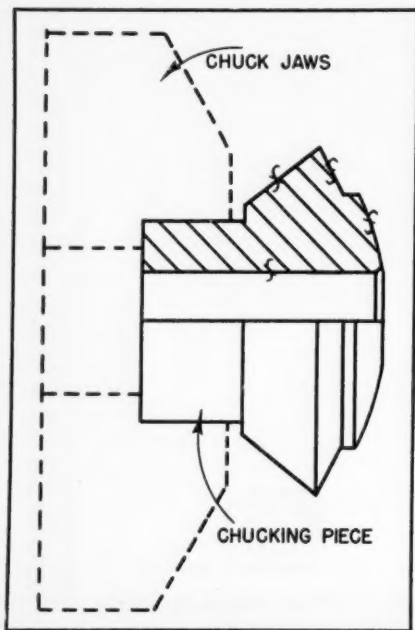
The differential bevel pin shown in this sketch is produced from a high tensile steel forging which is supplied with a chucking piece integral with it.
